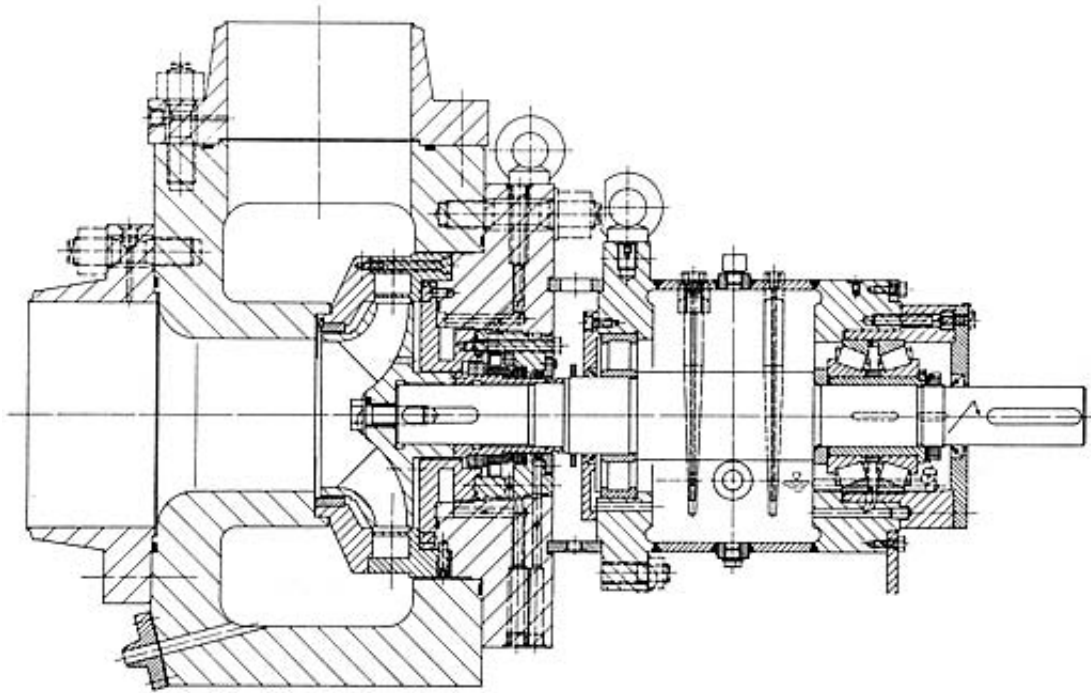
Residual heat removal pump for auxiliary and safety circuits, used to supply cold borontreated water to the system so that the decay heat after reactor shutdown can be carried away
